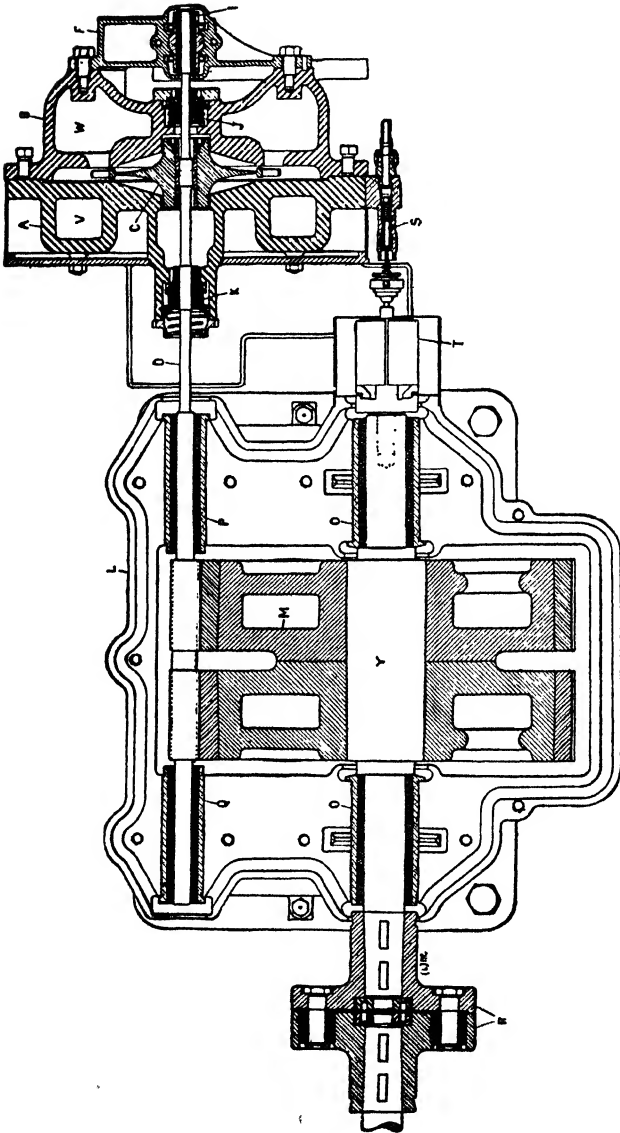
Sectional plan of an early type of De Laval steam turbine.
